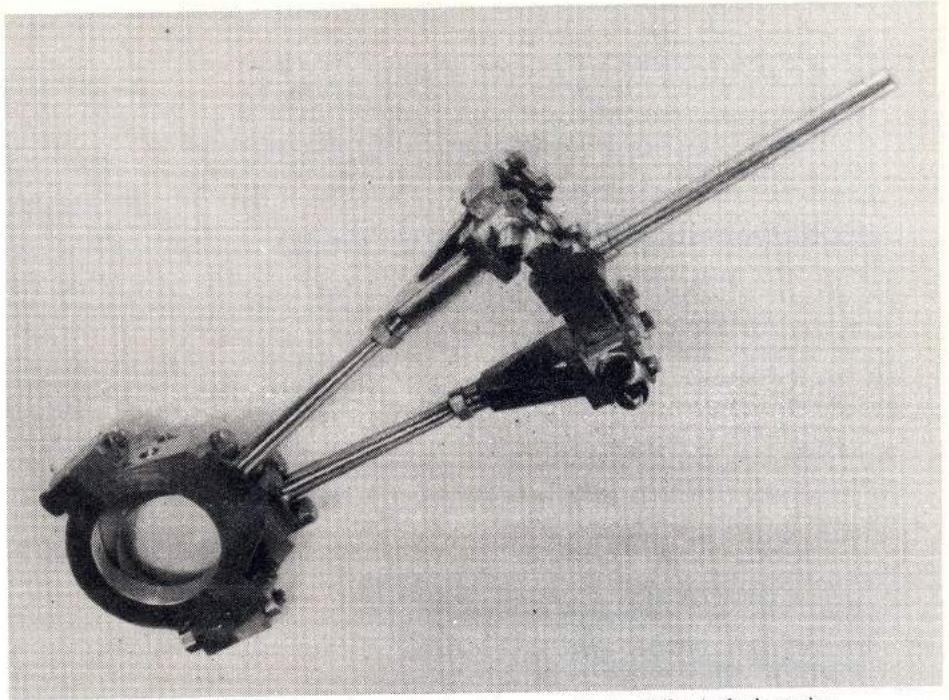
The eccentrics and link assembly fitted to one cylinder of the Author's engine.
